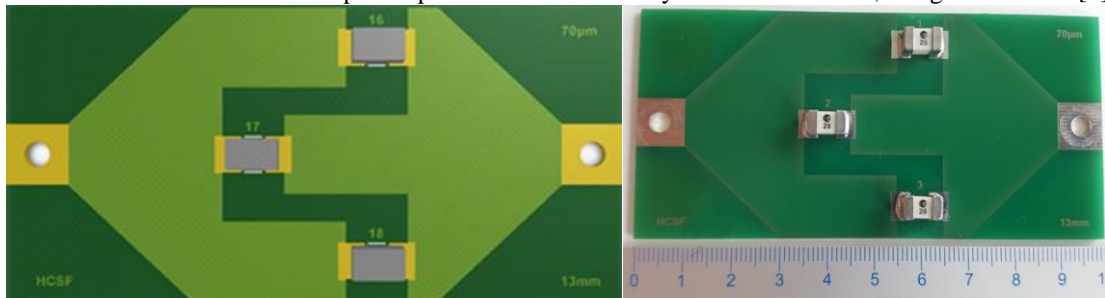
PCB layout for 3 HCSF 10 A in parallel and characterisation test board, SCHURTER AG in March 2016
